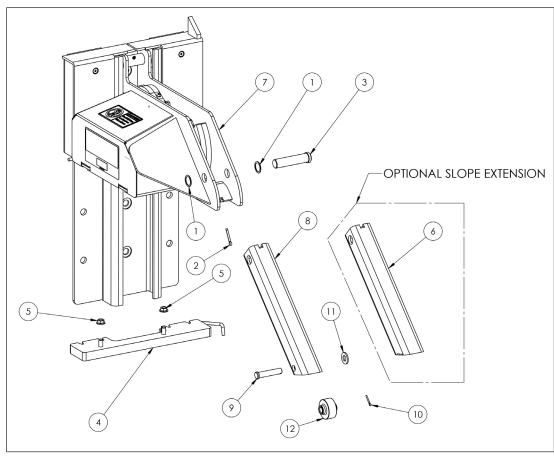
C—SLOPE EXTENSION ASSEMBLY
